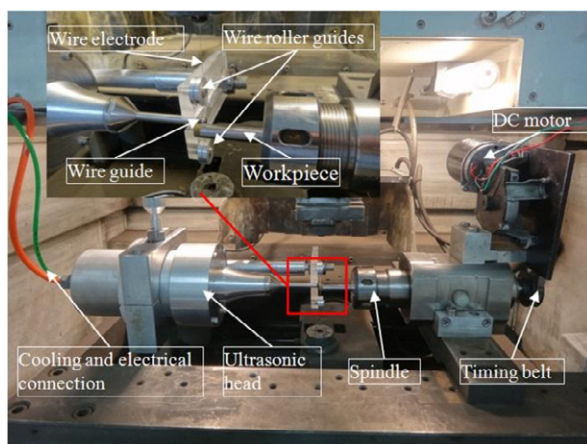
Spindle and ultrasonic head in five-axis WEDM machine
